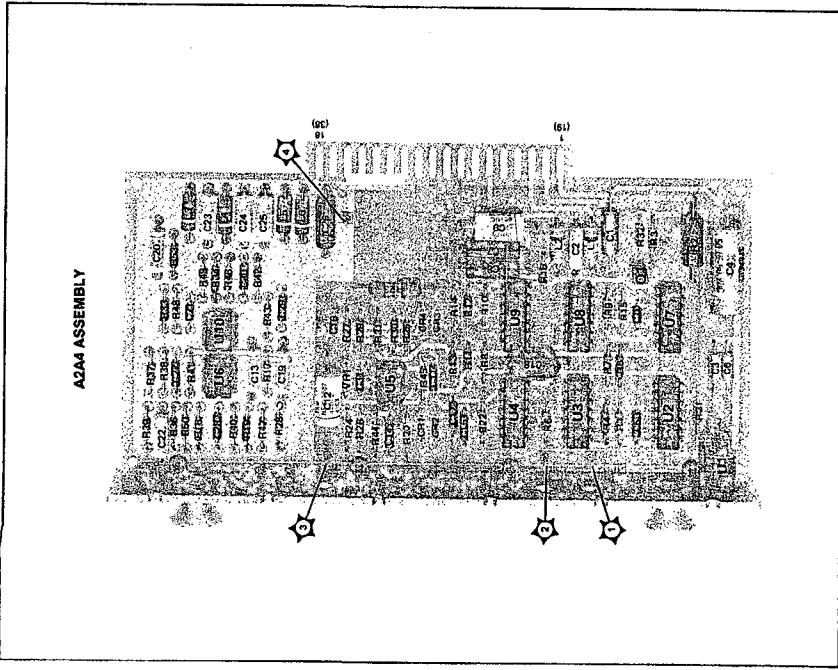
AZ44 20/30 Phase Detector Assembly Component and Test Point Locations
